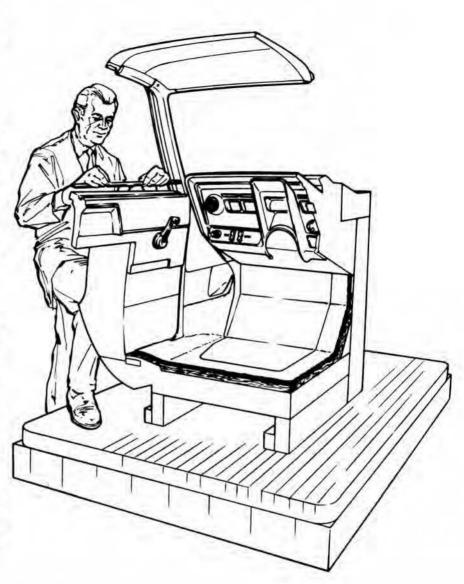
TRIM BUCK. To prove the accuracy of molding and trim designs, wooden bucks such as the one shown here were built.
